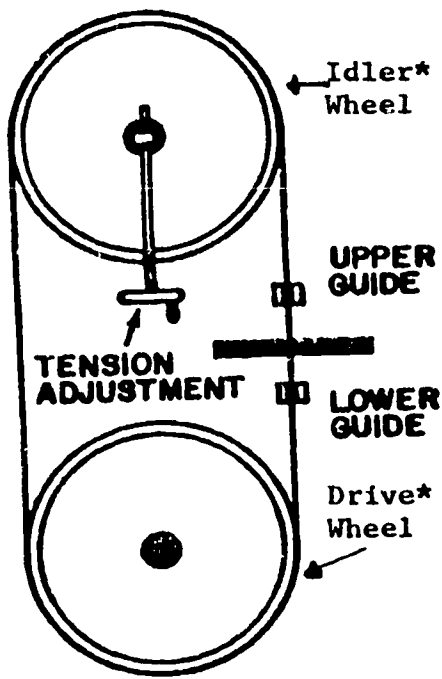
Blade Tension-Adjustment Handle on a Band Saw
